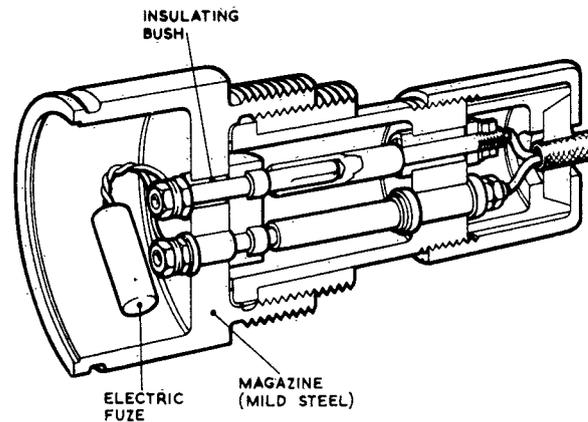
Igniter used in 4-sec. assisted take-off unit
